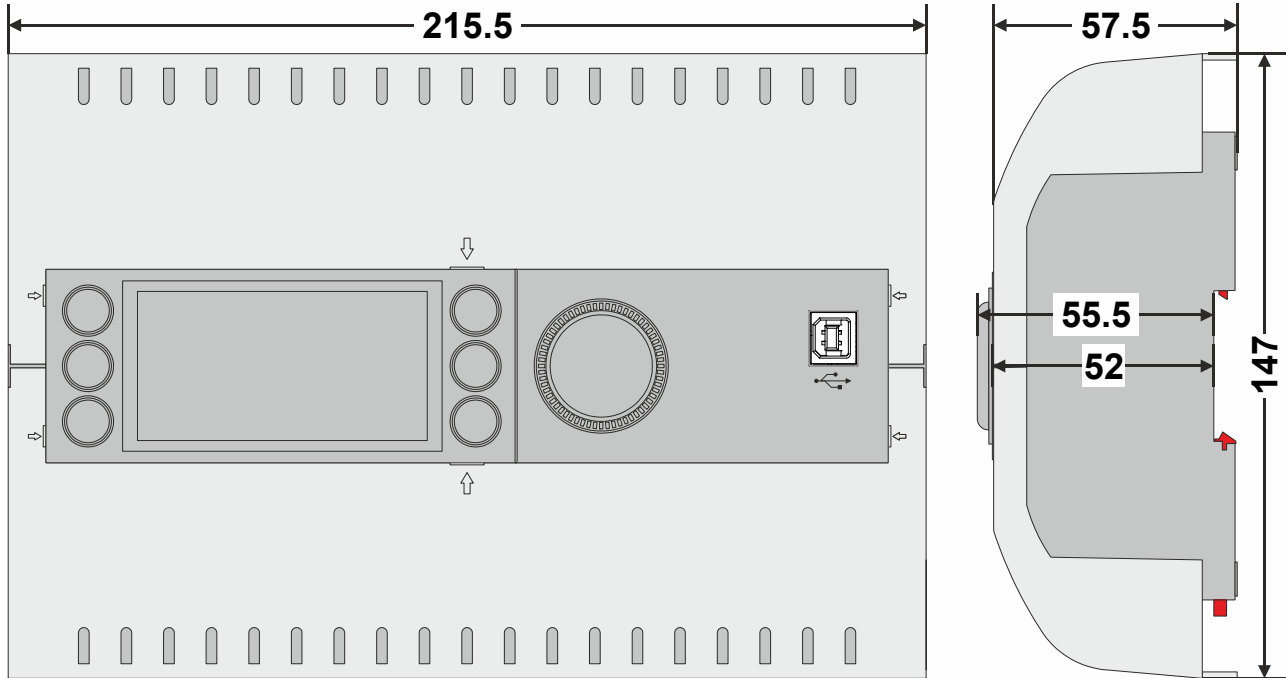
EAGLE Controller with built-in HMI (with MVC-80-AC1), dimensions (in mm)
